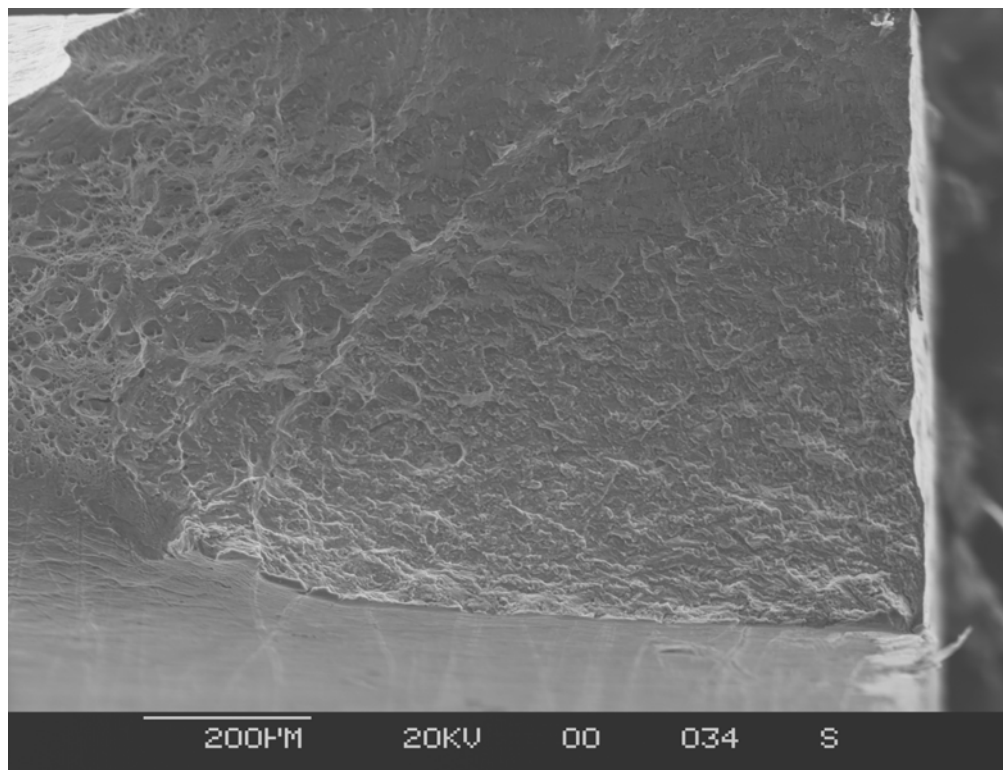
Corner Fatigue Crack on Fracture Surface of Specimen 5636.
